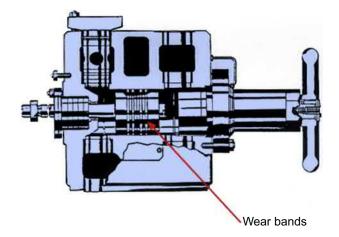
Sectional view of a compressor cylinder showing the wear bands. Courtesy of Worthington Compressors.
